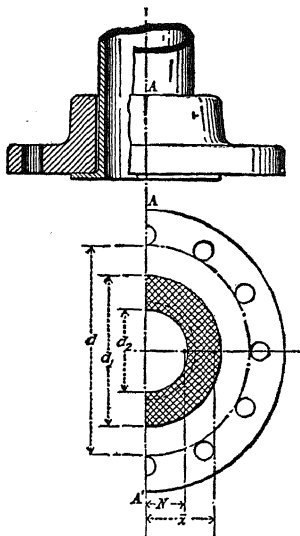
Stress conditions in lapped flanges due to tightening of bolts.
